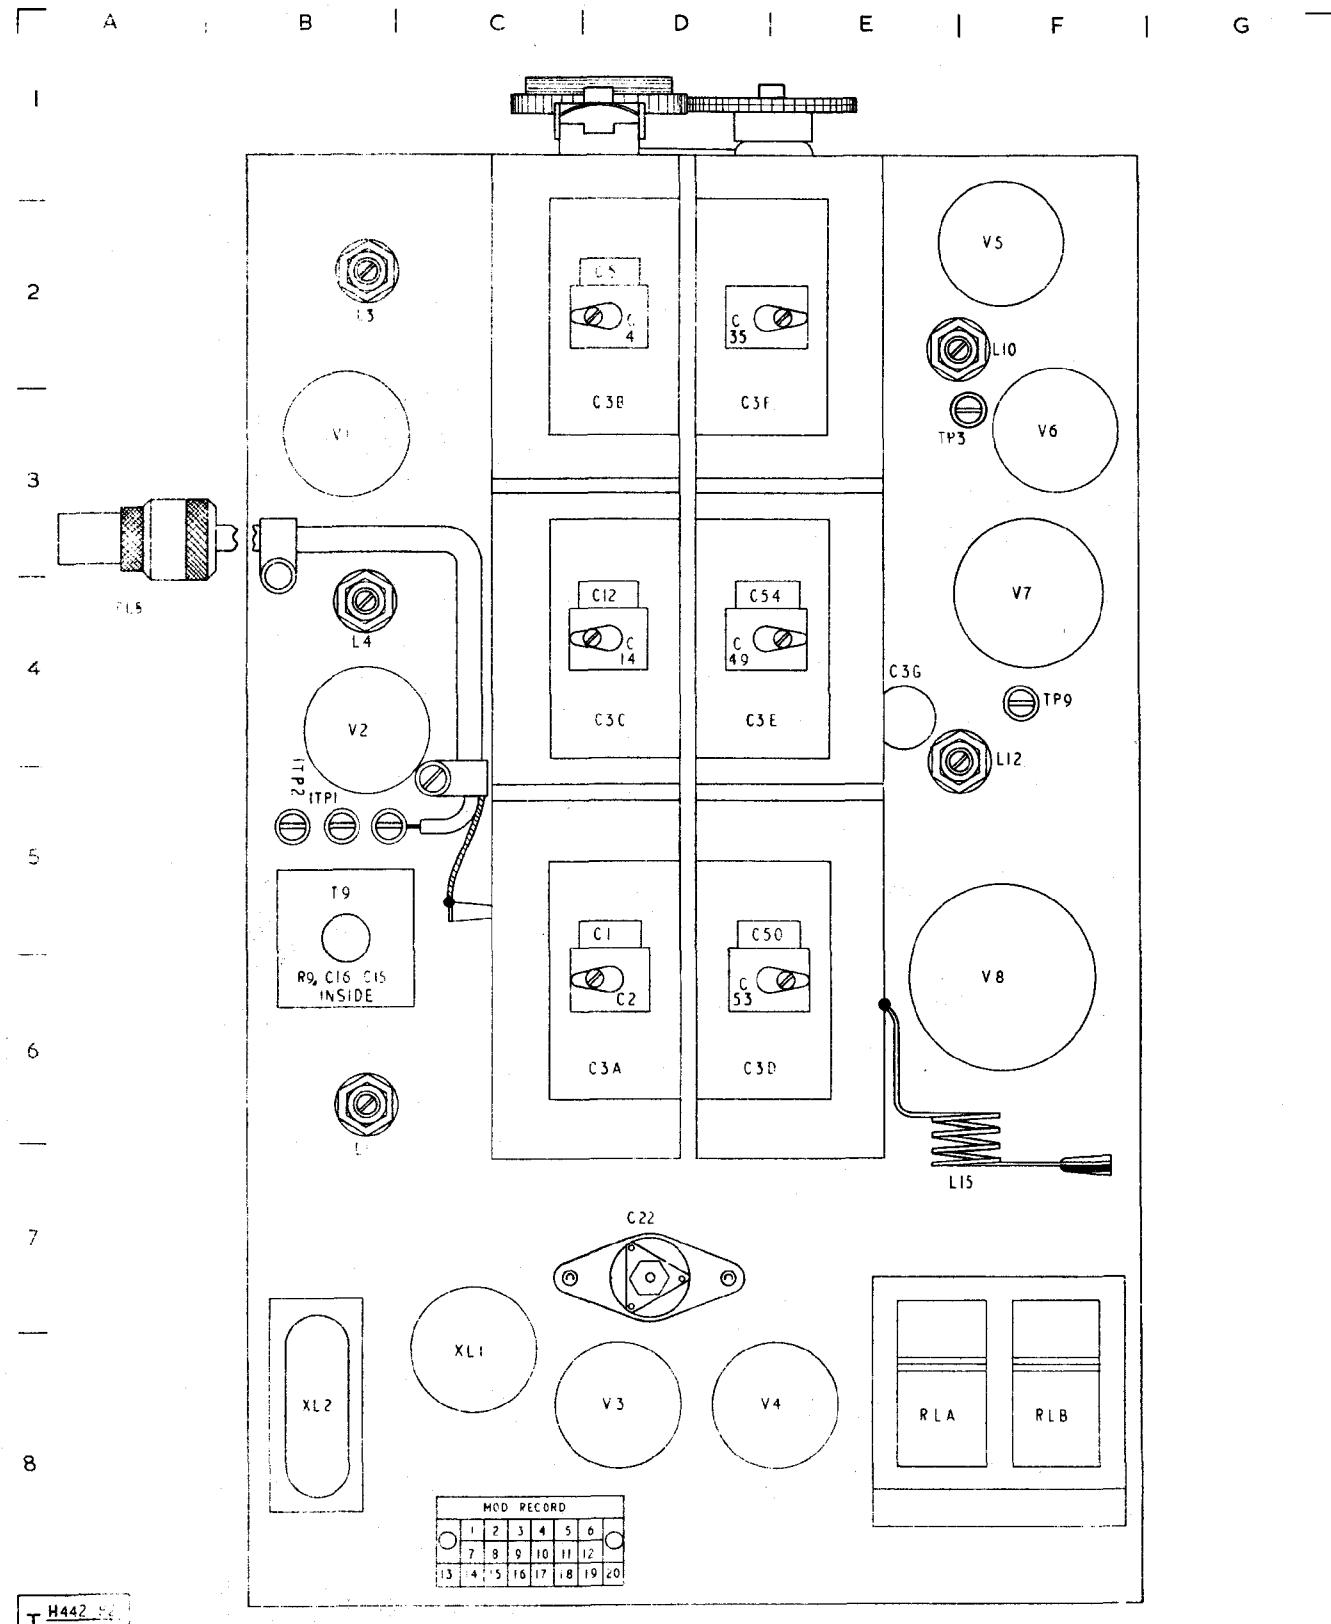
Transmitter-receiver sub-assembly, layout below chassis
